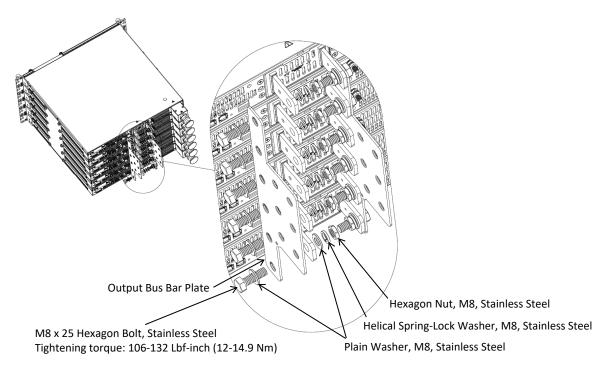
Six 60V-100V Units Output Bus Bars Plates Assembly
